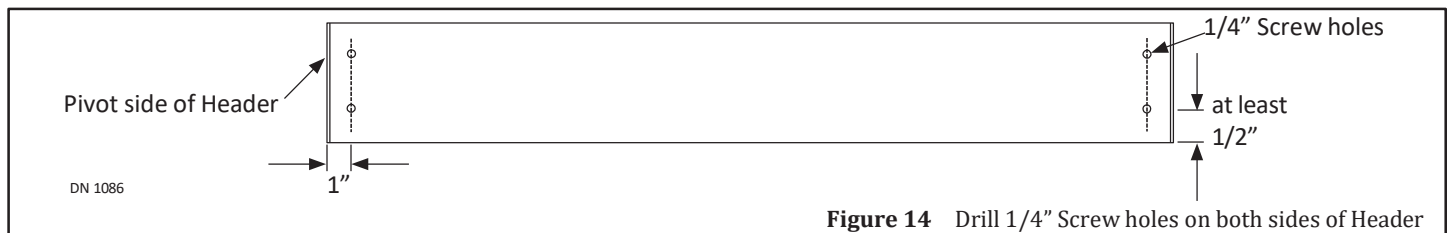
Drill 1/4 inch Screw holes on both sides of Header
